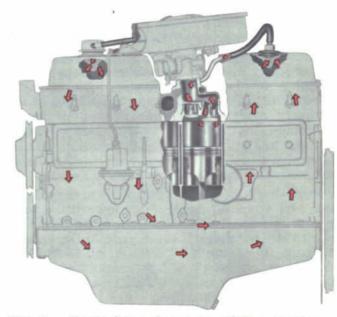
Typical Crankcase Ventilation System — 6-Cylinder Engine
